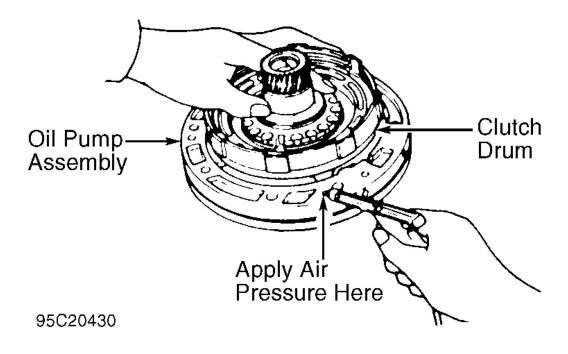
Removing Clutch Piston On Overdrive Clutch Courtesy of ISUZU MOTOR CO.
